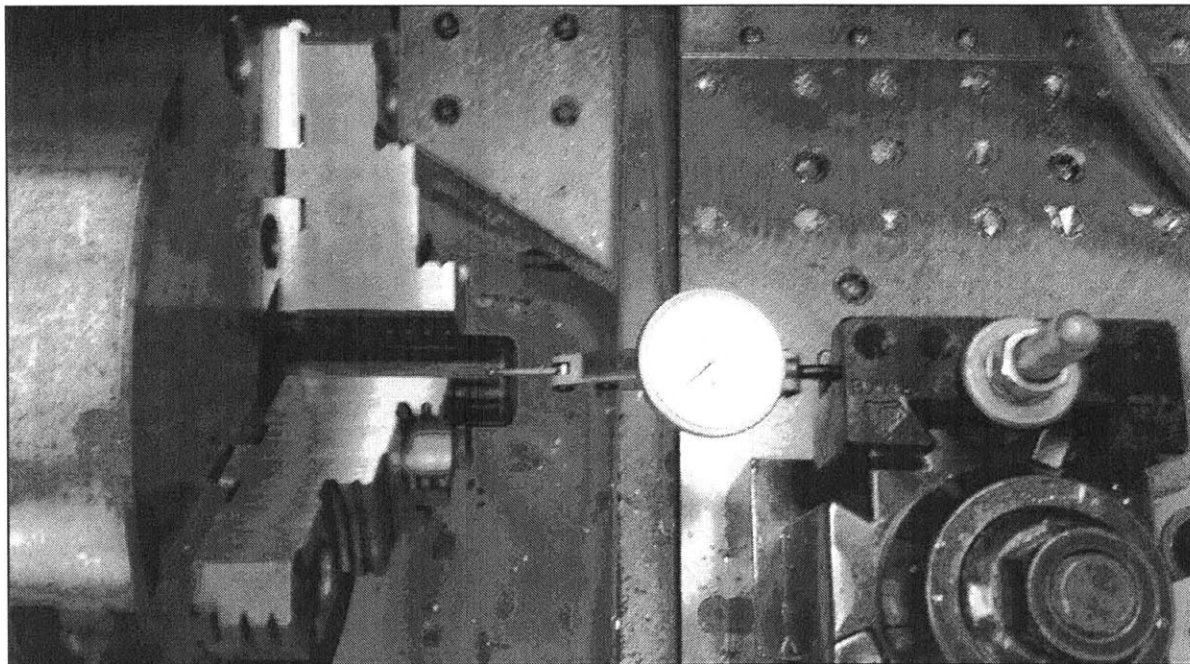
Setup used to minimize wobble when removing and replacing parts in the lathe jaws. Dial indicator (pictured) and buck chuck were used to achieve a high degree of concentricity.
